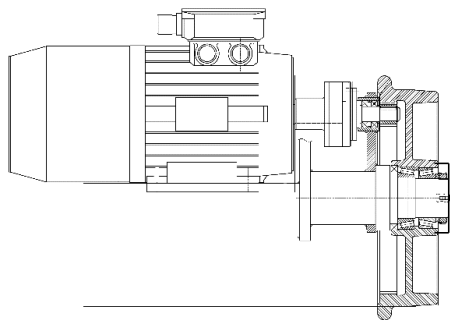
Electric drive of a guide roller with a 5kW motor and 720 rpm
